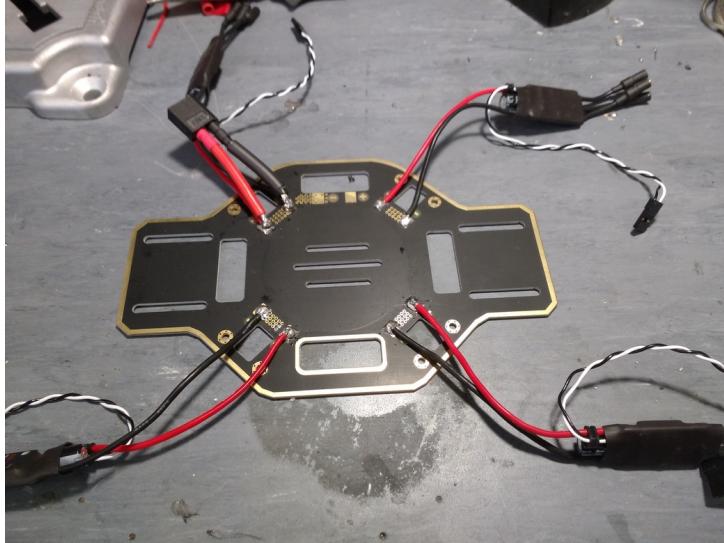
First solder the battery female connector removed from the power circuit on the PDB/baseplate taking note of the polarity (It is soldered last in the photo but you shouldn't do this). Make sure there is enough clearance for the drone arm when soldering the connector as these cables do not bend. Make sure to take note of the drone's orientation. The battery connector should be soldered at the back left arm. Solder each of the ESCs on the PDB taking note of the polarity. Perform a continuity test with a multimeter to ensure the connections are correct and there are no short circuits. The voltage used by the multimeter to measure continuity may in some cases result in the ESC transistors to become conductive and show continuity between the negative and positive terminal. If you swap the multimeter probes this should stop.
